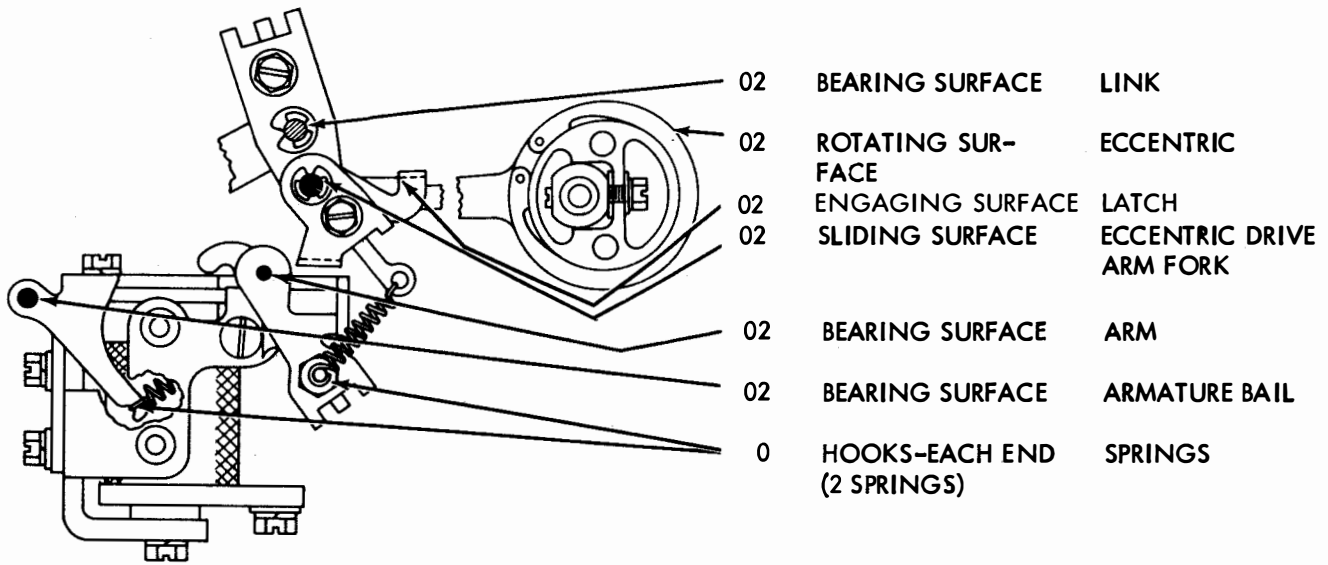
Power Drive Backspace Mechanism, Early Design
